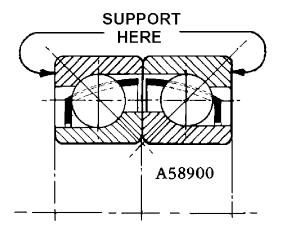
ANGULAR CONTACT BEARING ASSEMBLY
